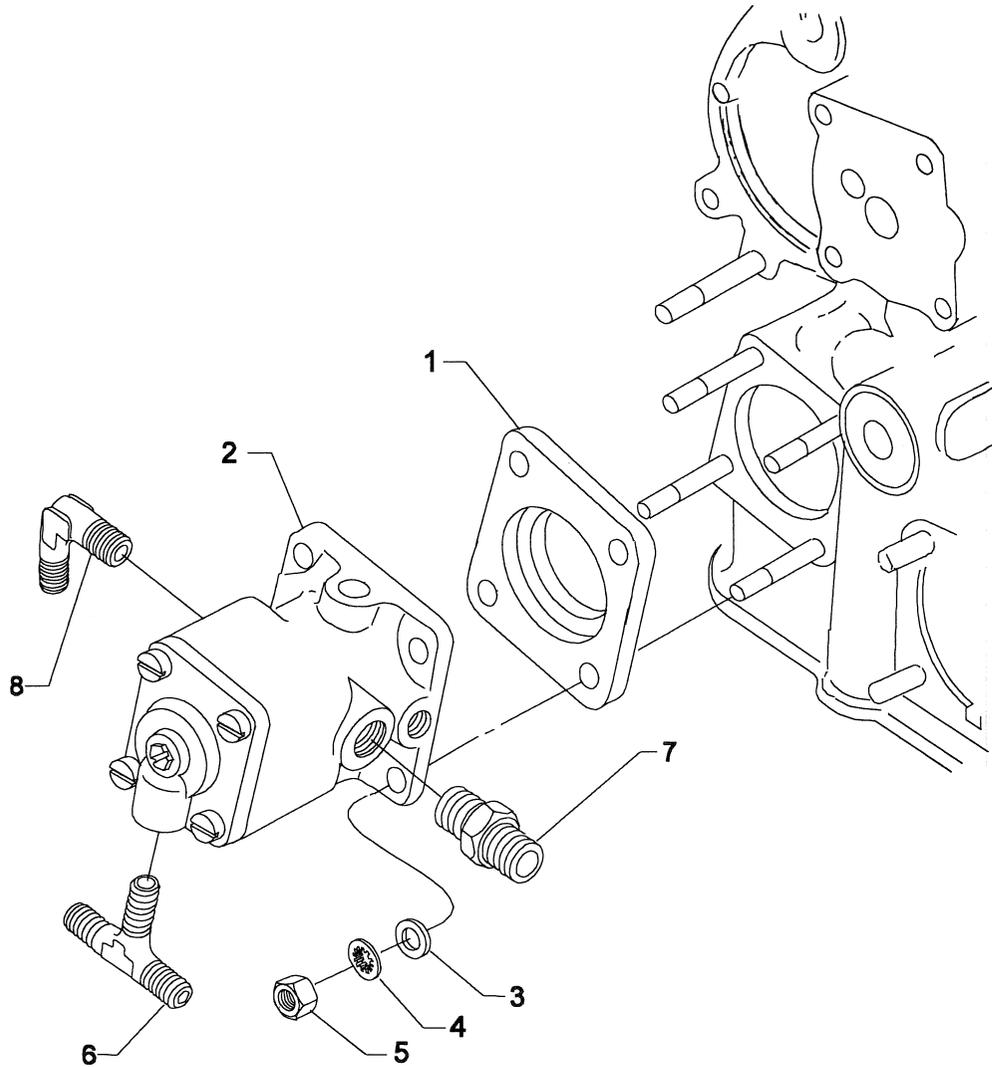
OIL PUMP ASSEMBLY AND ACCESSORY HOUSING ATTACHING PARTS
